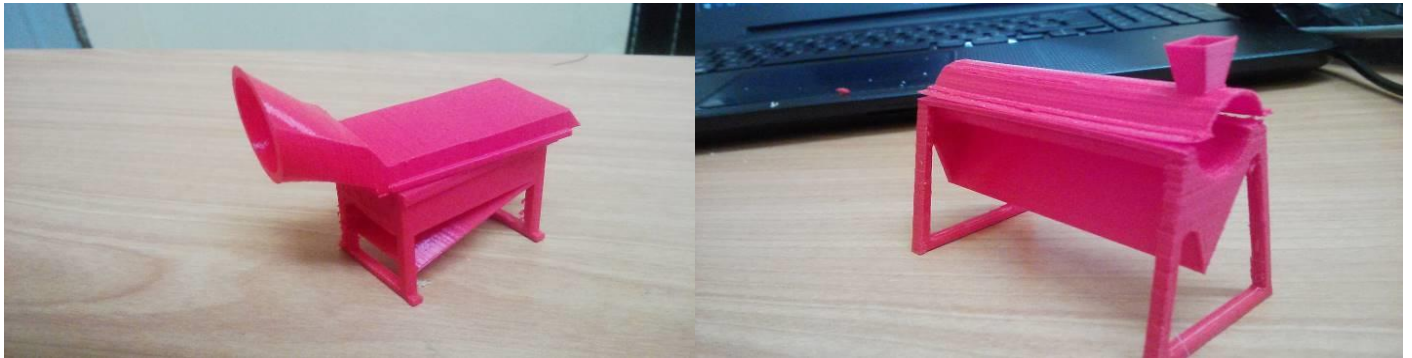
Maize Sheller and Maize Grinder 3D Printed Frames
